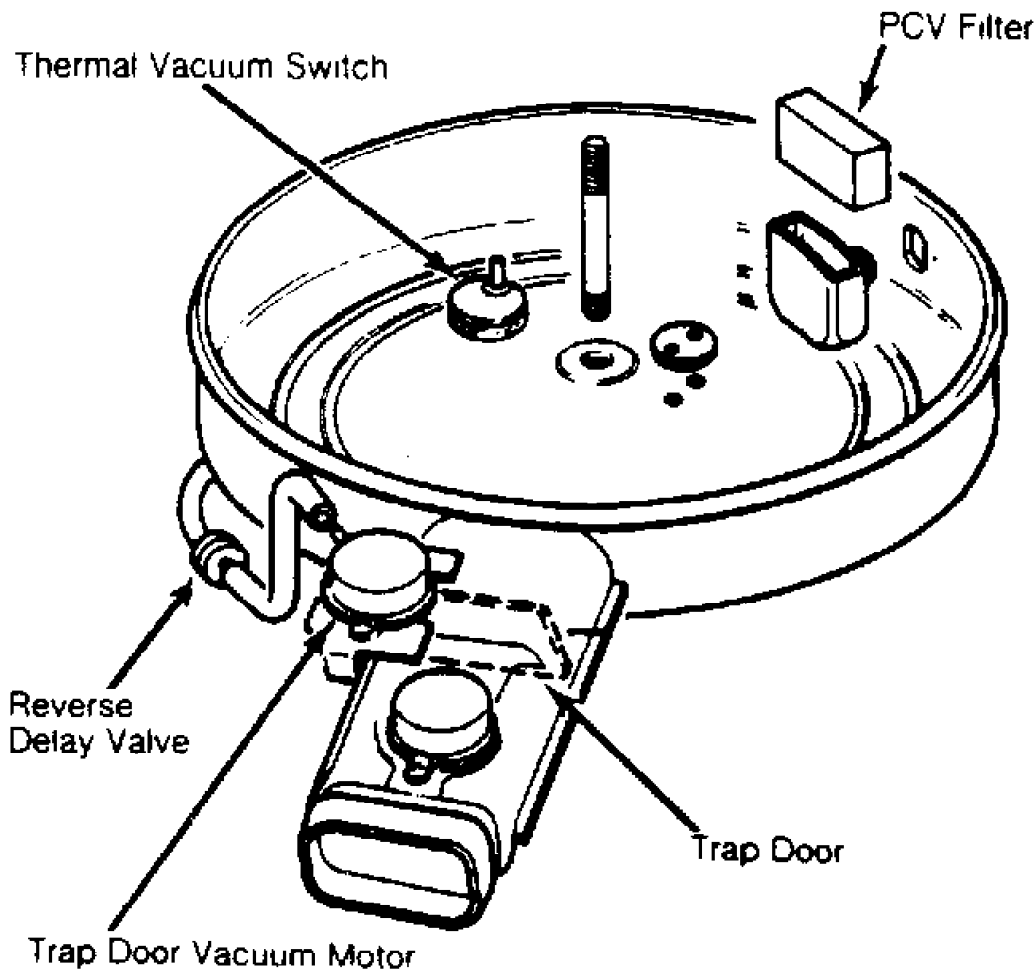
Thermostatic Air Cleaner (TAC) Assembly
